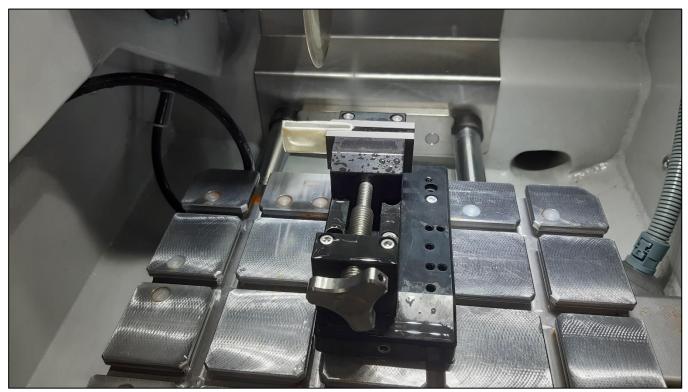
Overview of the clamping tool – glass sample is protected with paper tape.
